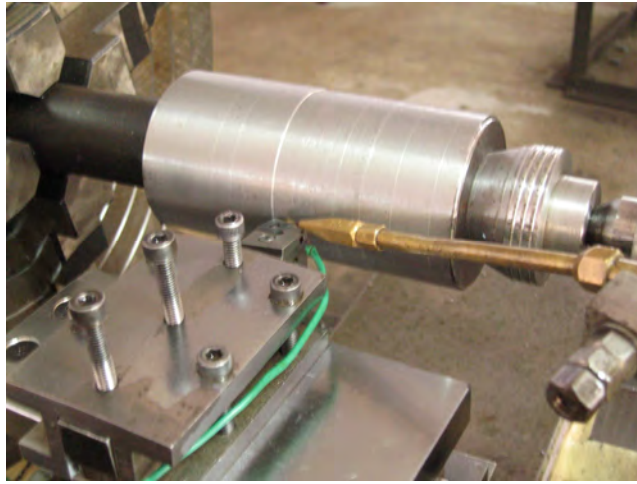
Photographic view of high-pressure coolant delivery nozzle injecting coolant during machining [Kamruzzaman 2009]
